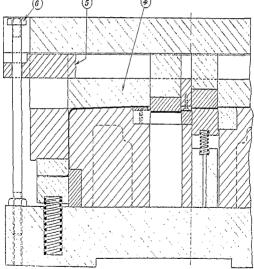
, Final draw, pinch-trim, and blanking die for vending-machine door. (Mills Industries, Inc.)
